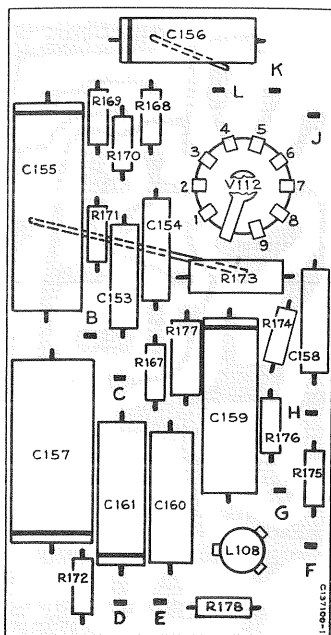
PC105 Horizontal Oscillator Assembly Layout
